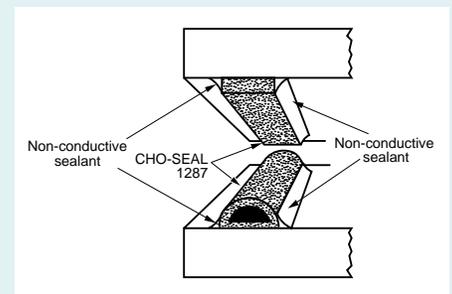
“Seal-to-seal” design incorporating CHO-SEAL® 1287 conductive silver-aluminum fluorosilicone gaskets on both mating flange surfaces. Gaskets are bonded and edge sealed to prevent moisture from entering the gasket/flange area.
